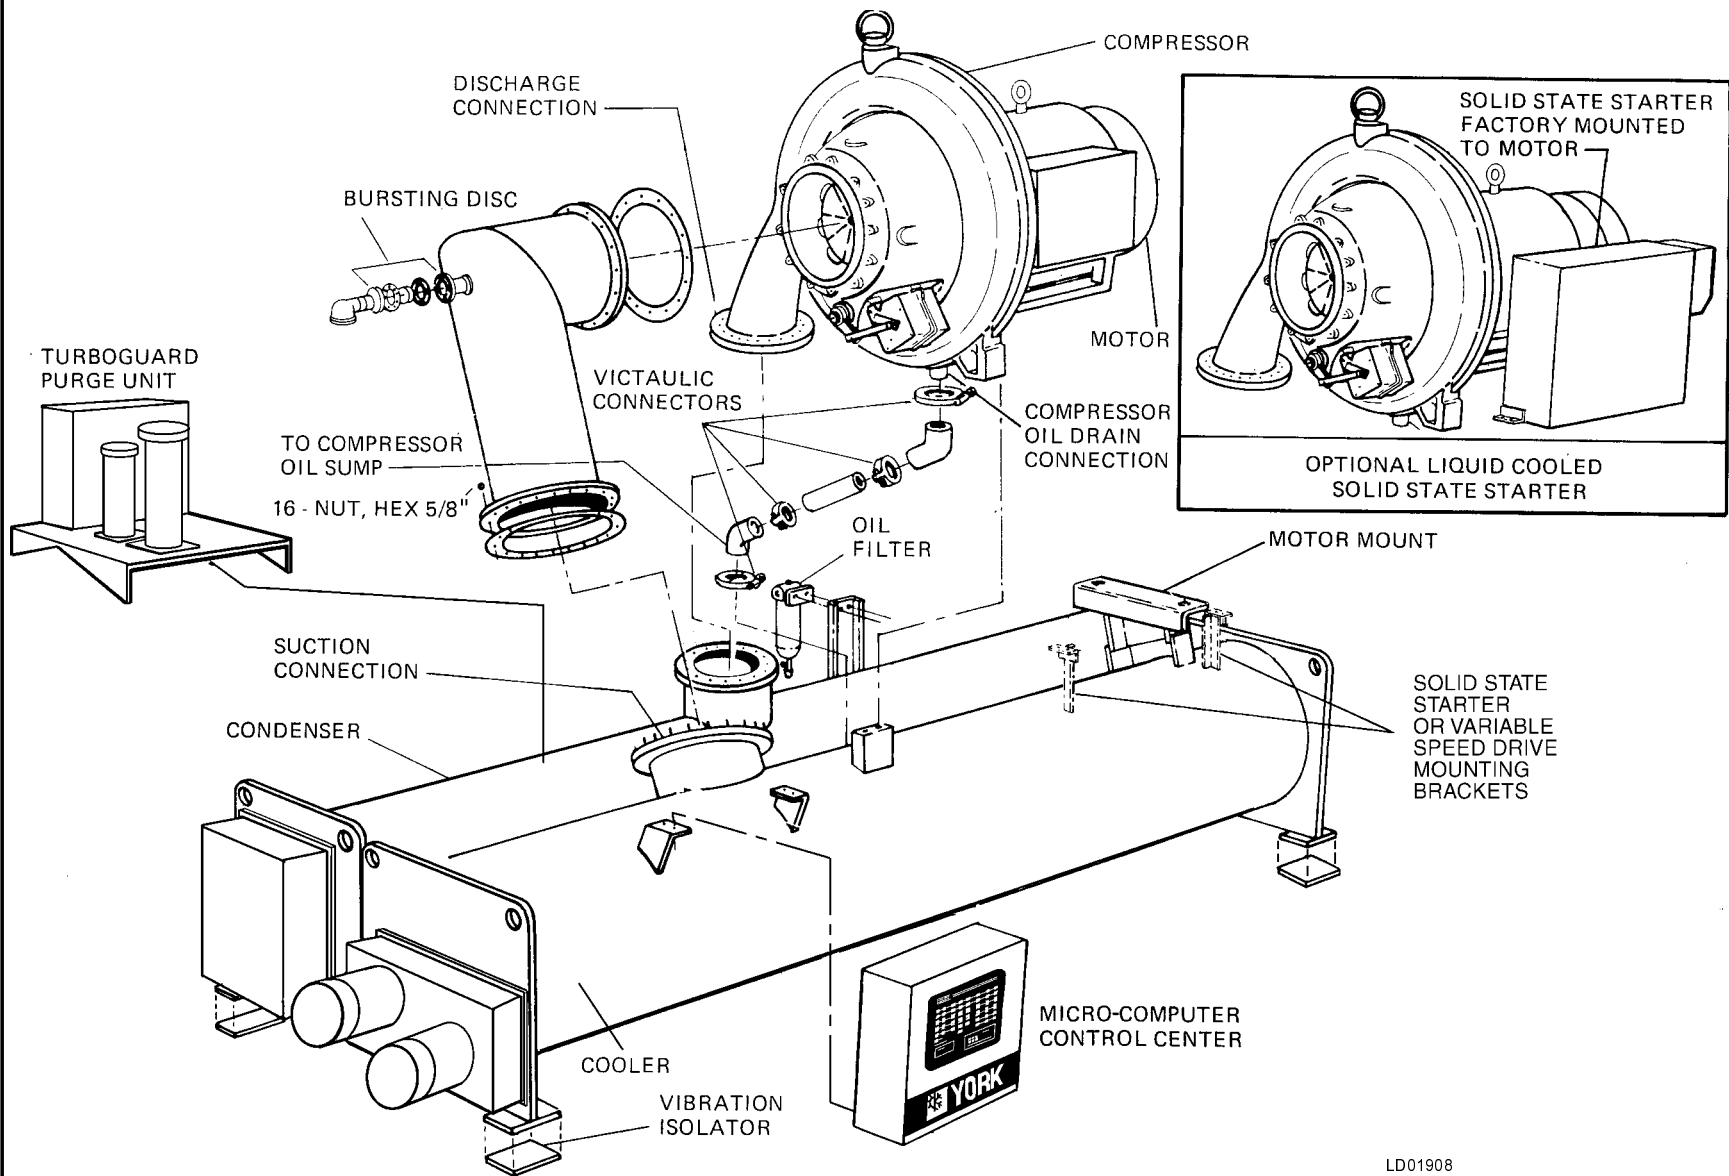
EXPLODED VIEW ASSEMBLY (F COMPRESSOR MODELS)
